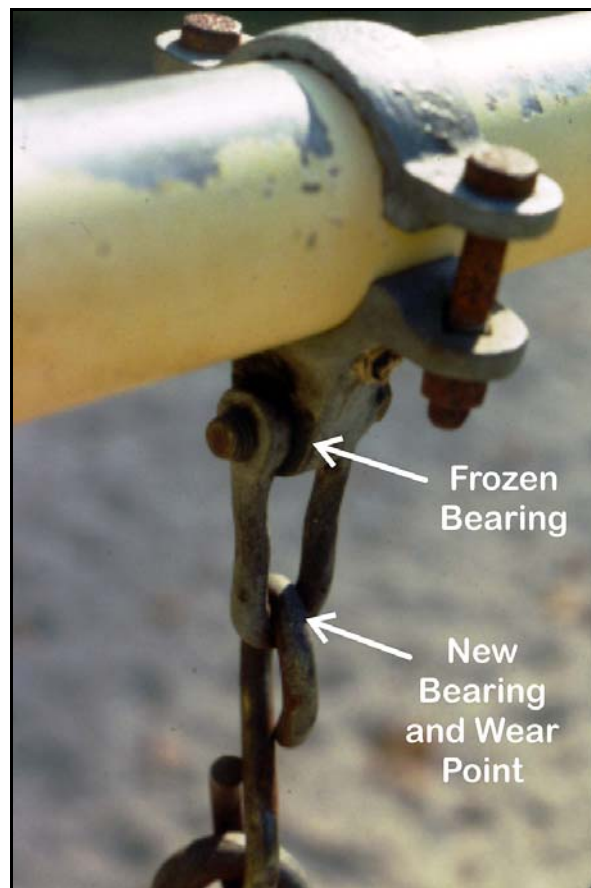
Frozen Bearing – Close inspection reveals a frozen bearing. This creates a new bearing and wear point on the "S" hook. Source: author [file: \PL_Bearing.jpg]
